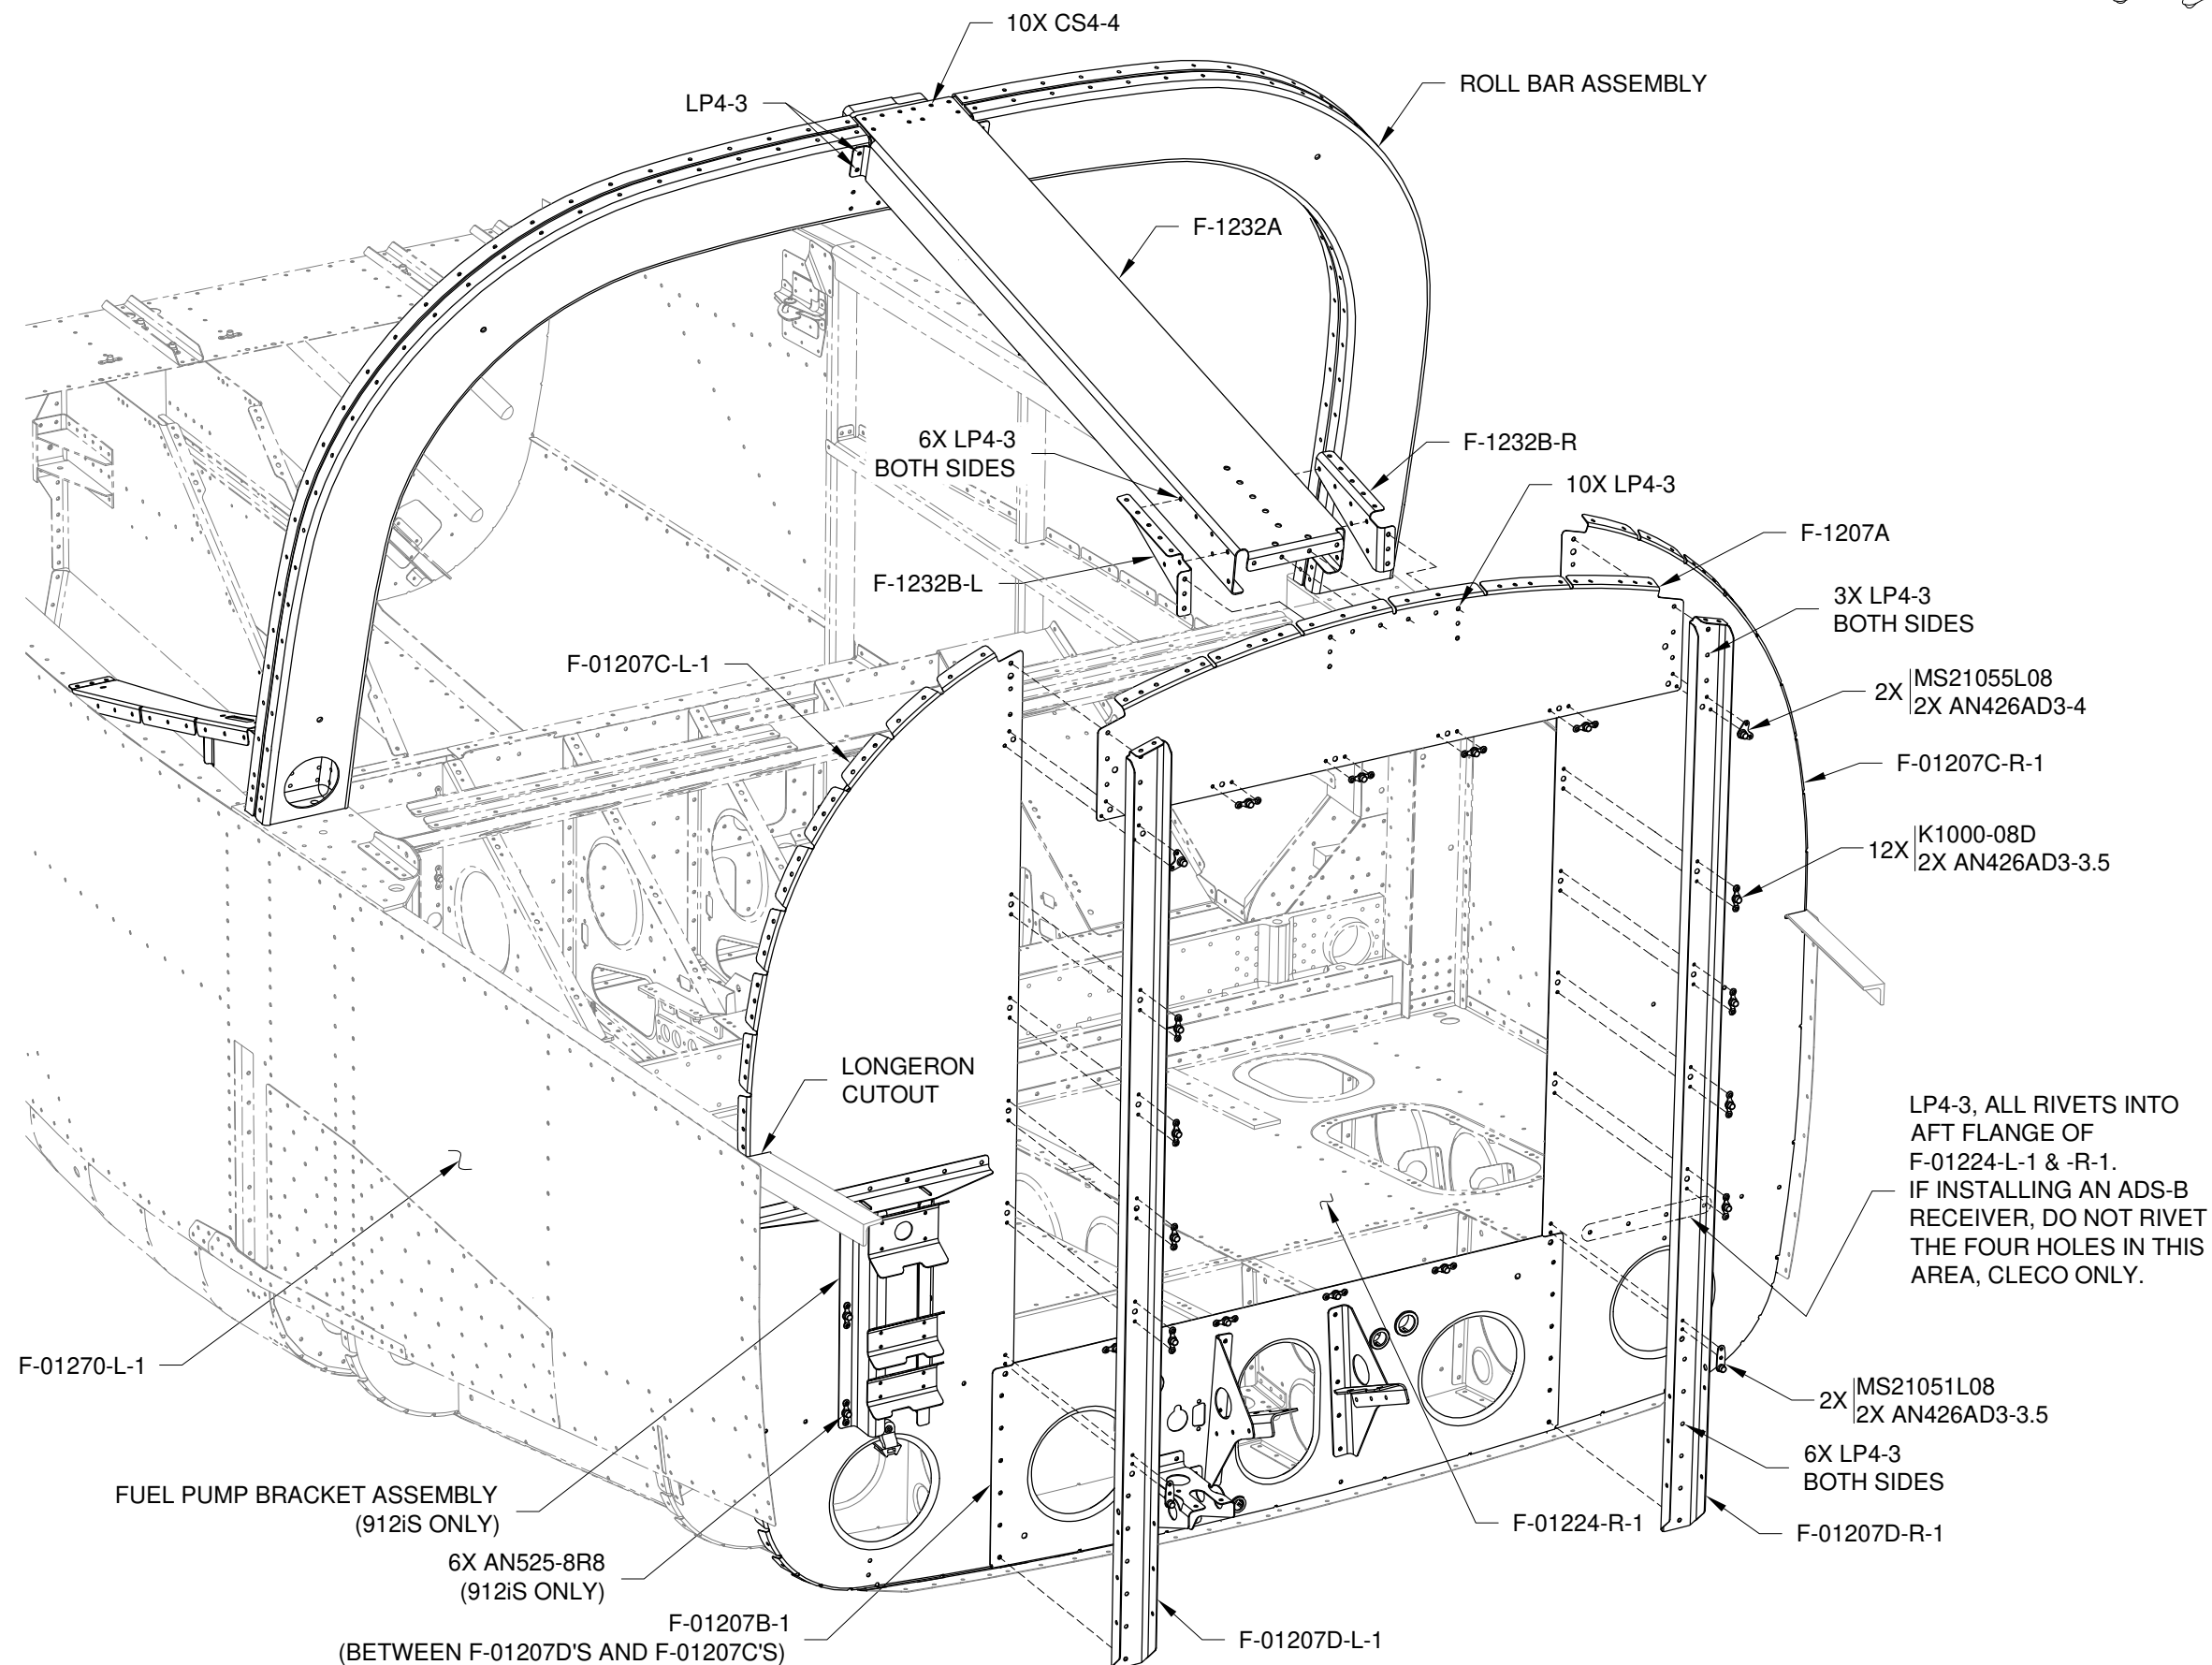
F-01207 BULKHEAD ASSEMBLY
